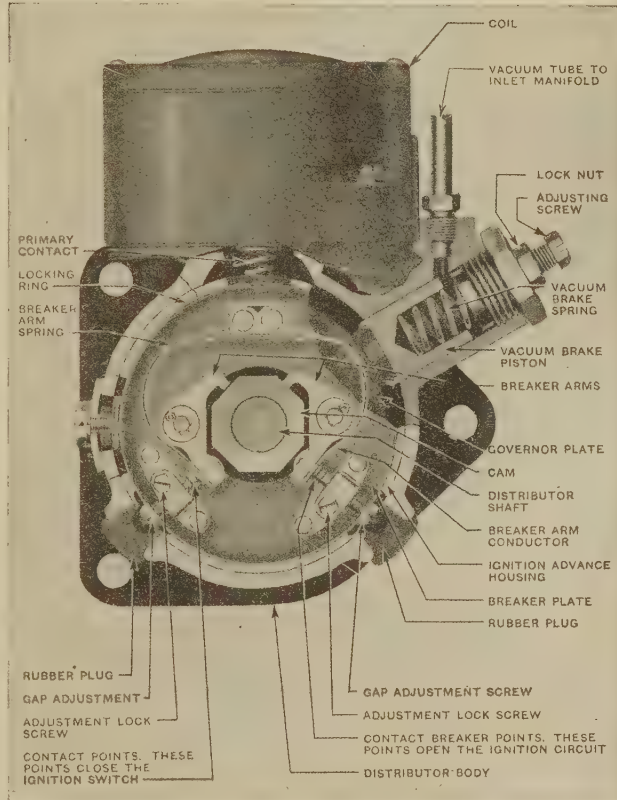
The Ford V-8 Contact-breaker Unit.
